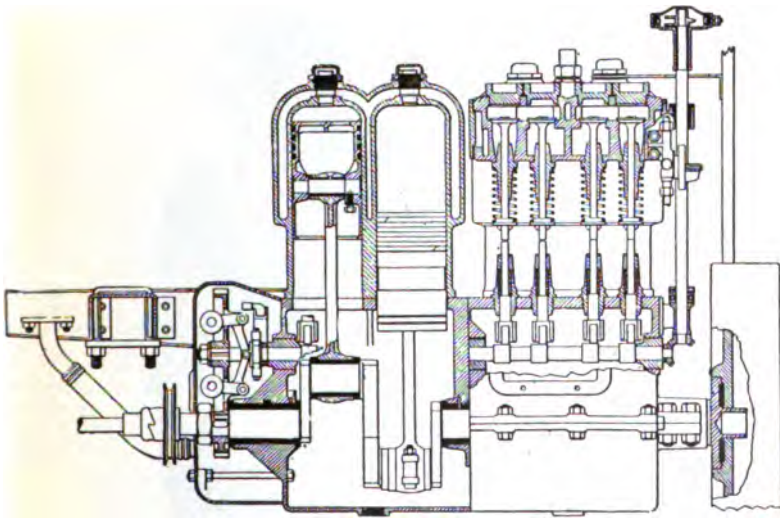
Part Sectional Elevation of the Packard Four-cylinder Motor, showing method of driving the inlet and exhaust valves from a single cam shaft.
